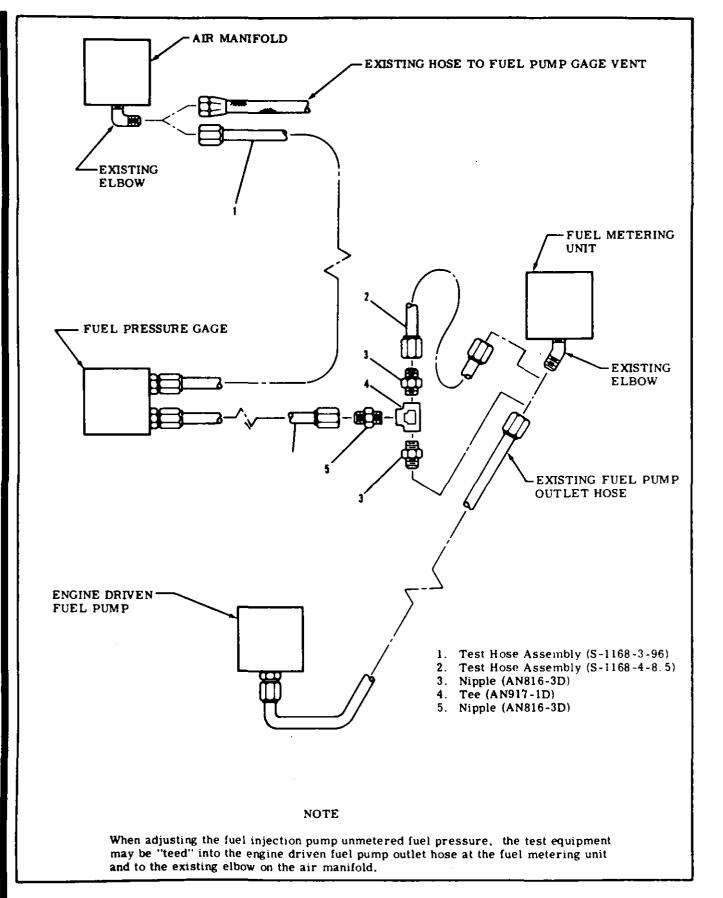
A-8. Fuel Injection Pump Adjustment Test Harness (Turbocharged Engine)
